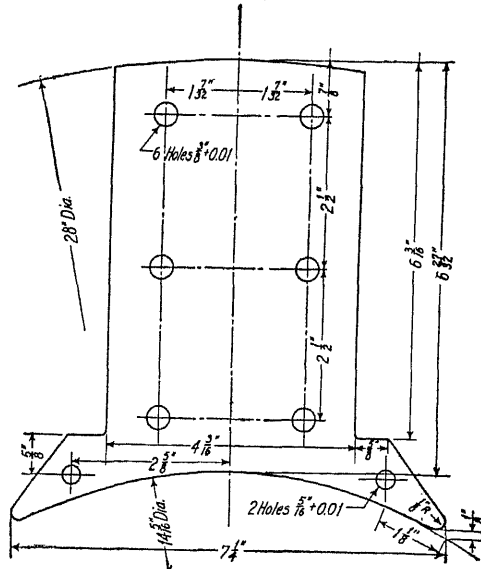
Detail drawing of pole punching, 50-kw., 1200-r.p.m. generator.
